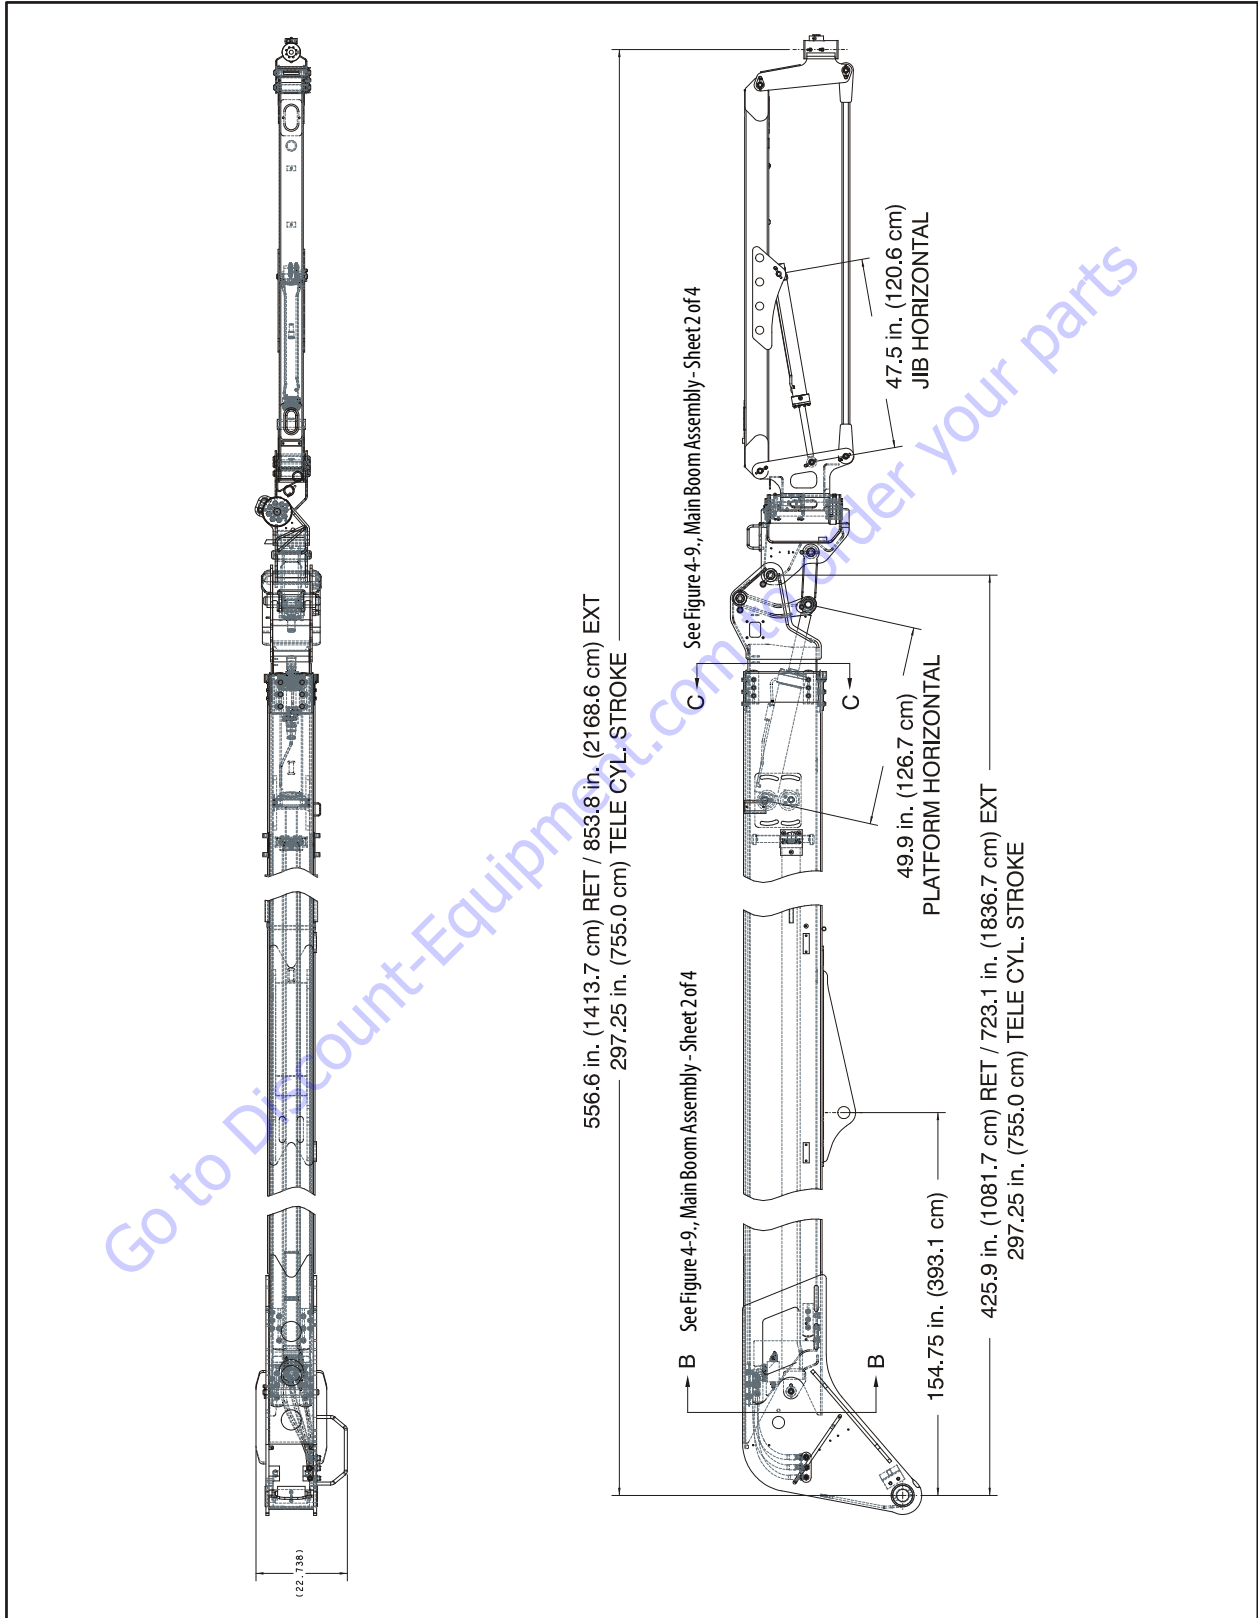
Main Boom Assembly - Sheet 1 of 4
